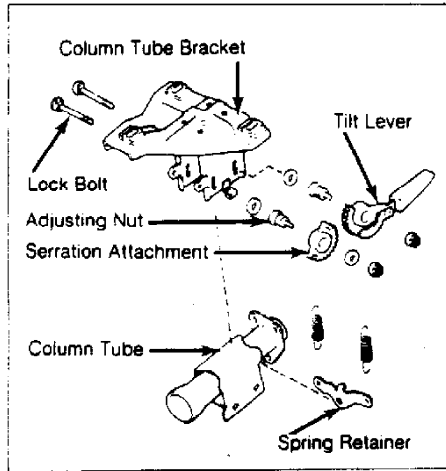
Exploded View of Camry, Corolla, MR2 & Tercel Steering Column Assembly
